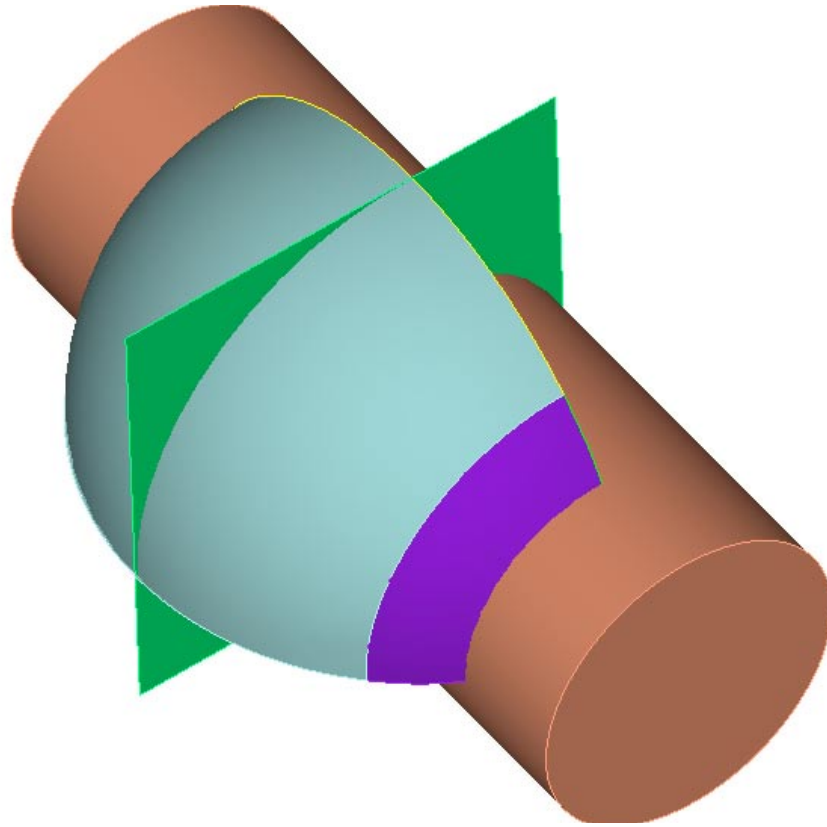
Cutting plane and cylinder shown to partition the eye quarter (solid view)
